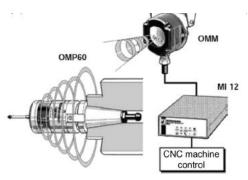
Signal transmission for touch probes using infrared transmission on a horizontal machining center
